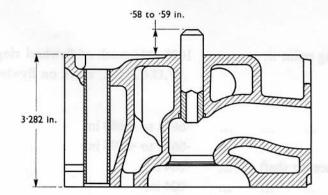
Sectioned view of cylinder head showing minimum depth after refacing, and assembled height of valve guides
